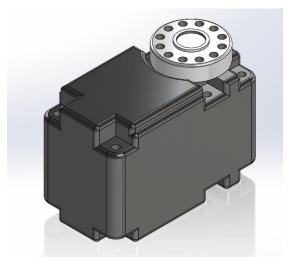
HerkuleX DRS 0201 motor with indented mounting holes
